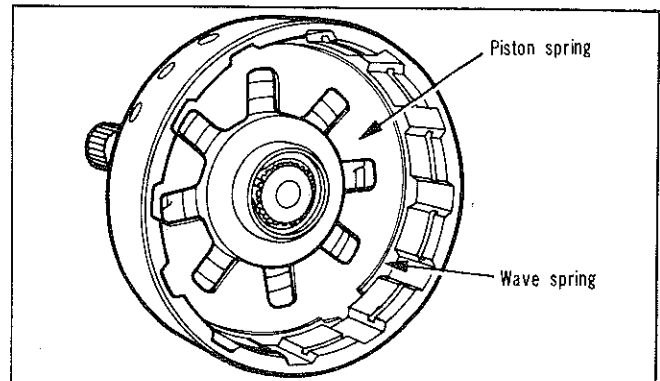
Installing rear clutch spring, spacer ring and wave spring
